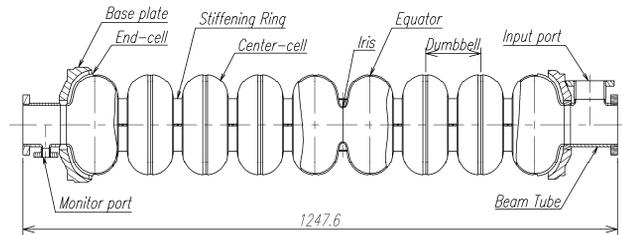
Drawing of 9-cell superconducting cavity without HOM couplers.
